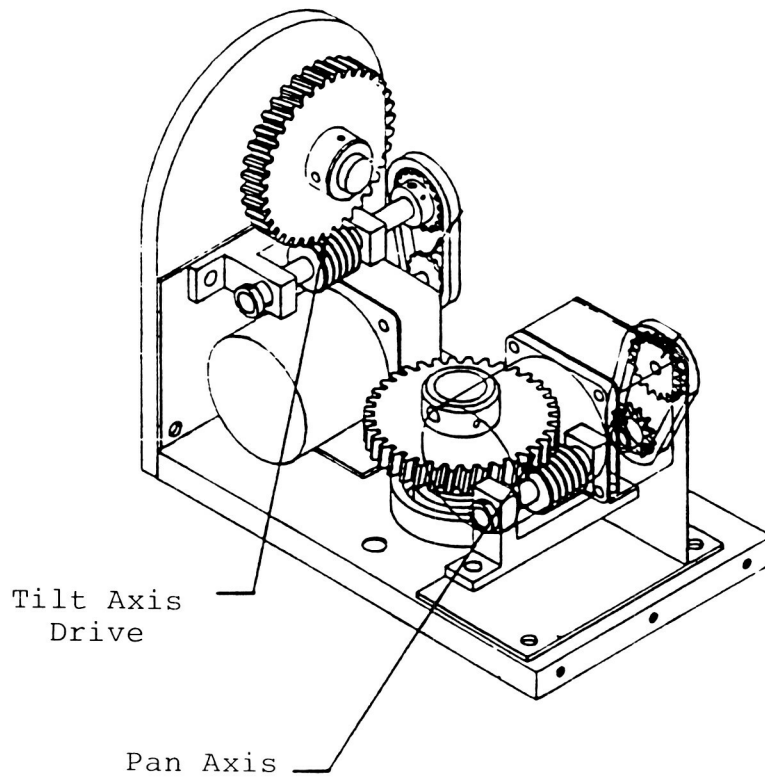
STAR Pan/Tilt Unit, Internal Drive Mechanisms
